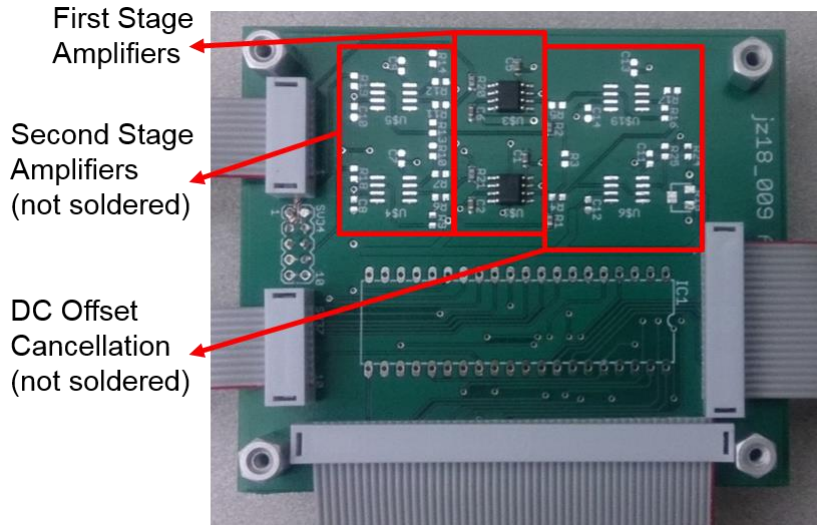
Accelerometer board for housing the device package and further signal amplification.
